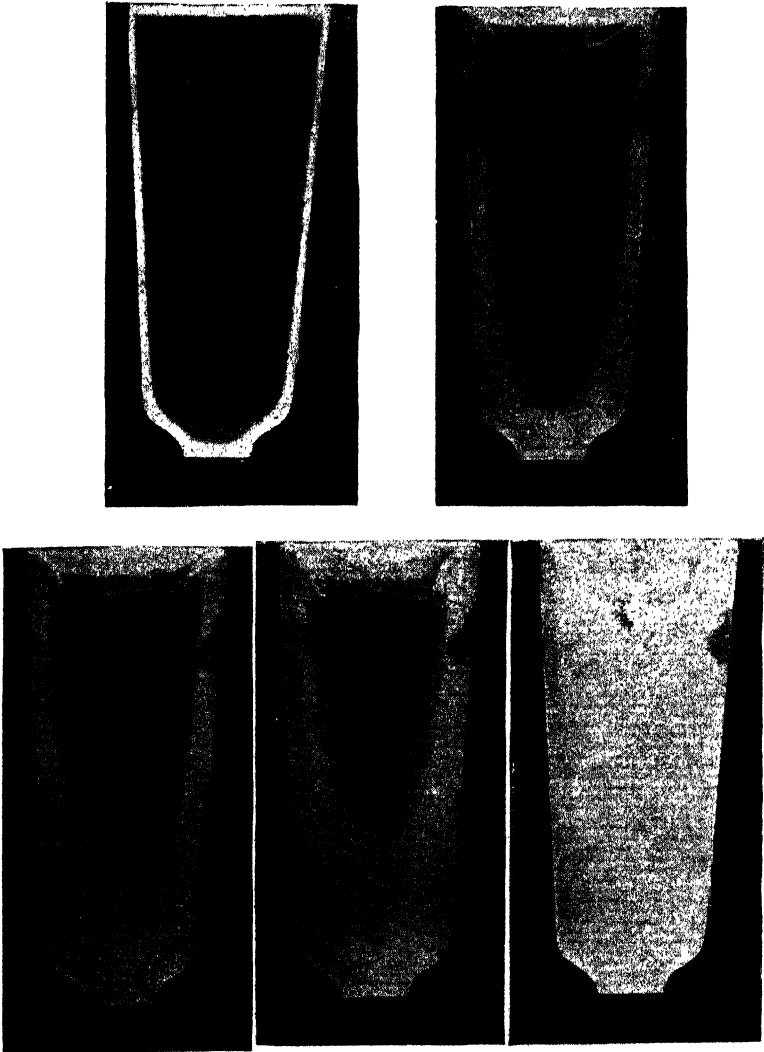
VII.—The progress of solidification of wax in a big-end-up mold. (Courtesy of The Gathmann Engineering Co.)
